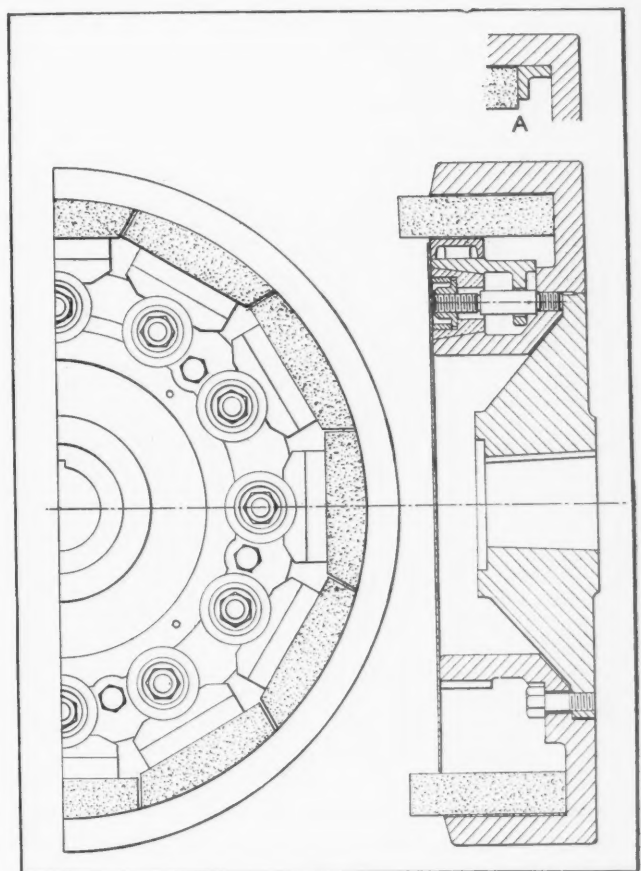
Chuck of Segmental Grinding Wheel Provided with a Filling Ring at A
